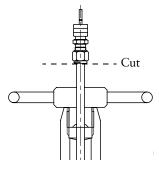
Longitudinal section through the tip of the adapter rod.
